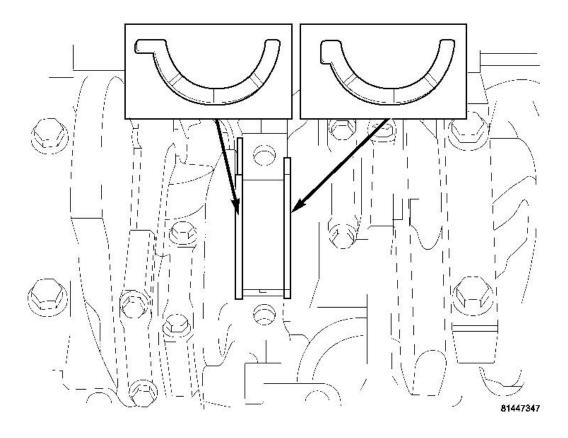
Main Bearing Cap Removal Courtesy of CHRYSLER LLC
